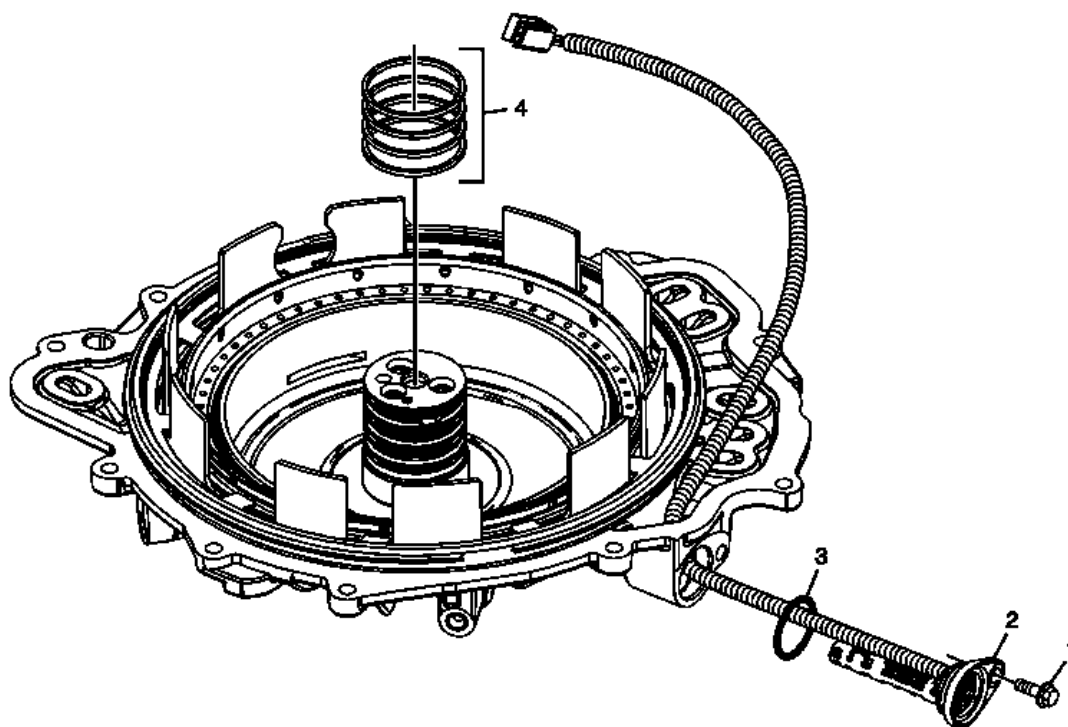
View Of 3-5 Reverse & 4-5-6 Clutch Fluid Seal Ring
